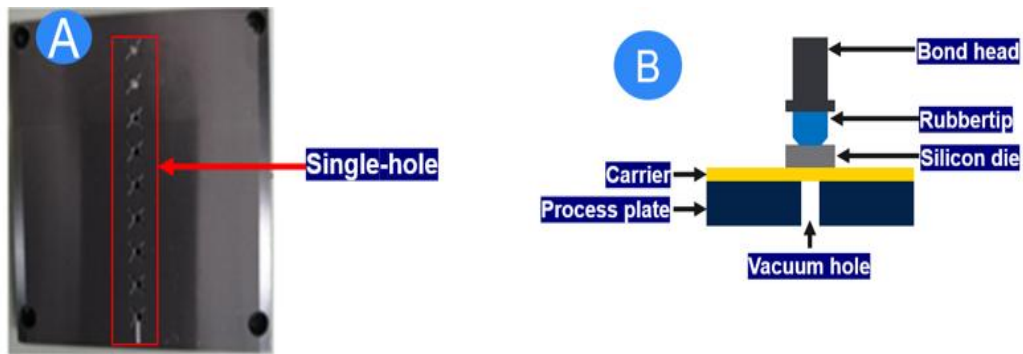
a) Single-hole process plate; b) cross-sectional view of the process plate and leadframe during die attach process
